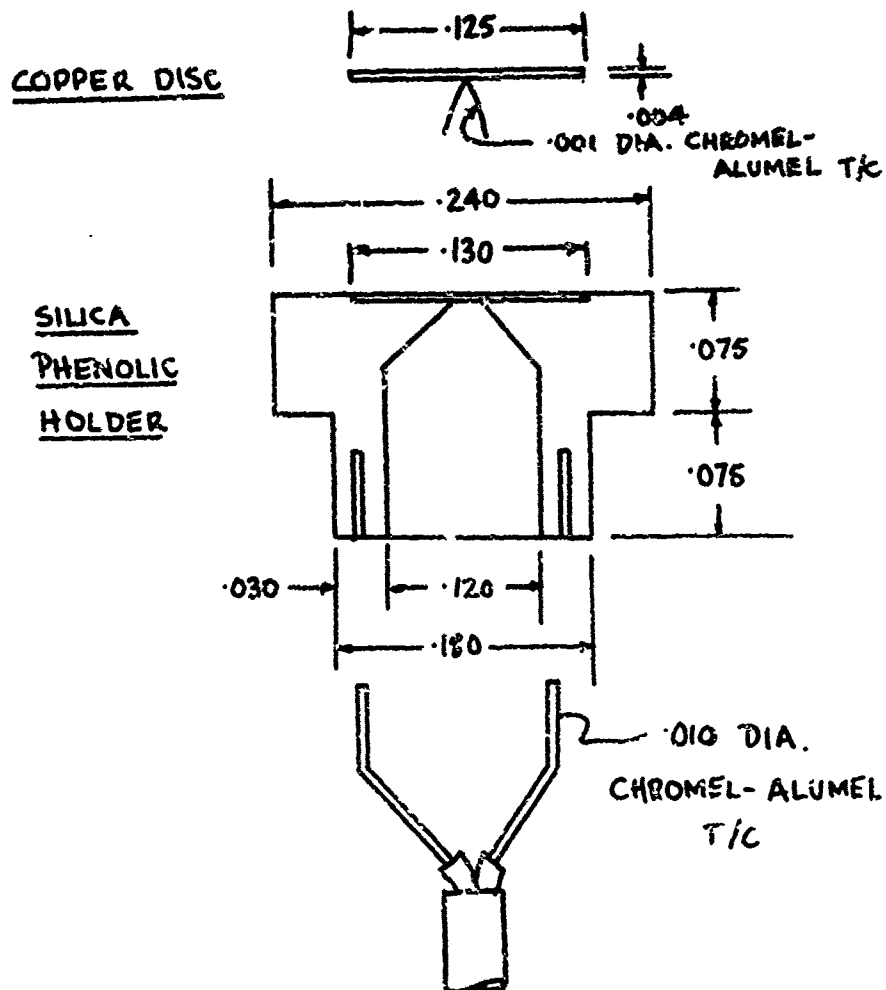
HEAT FLUX GAUGE ASSEMBLY
